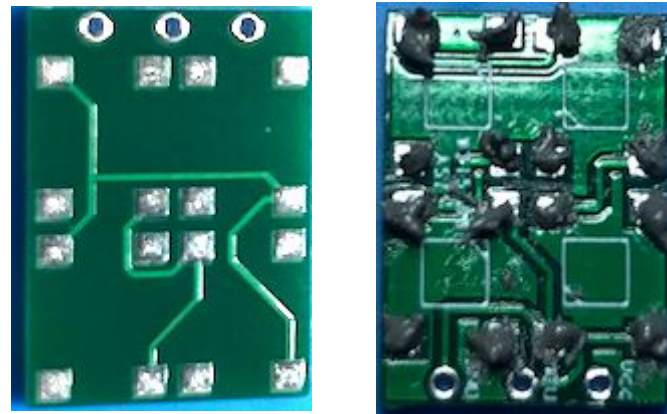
PCB footprints from our previous prototype were too close together making SMD soldering impossible.
